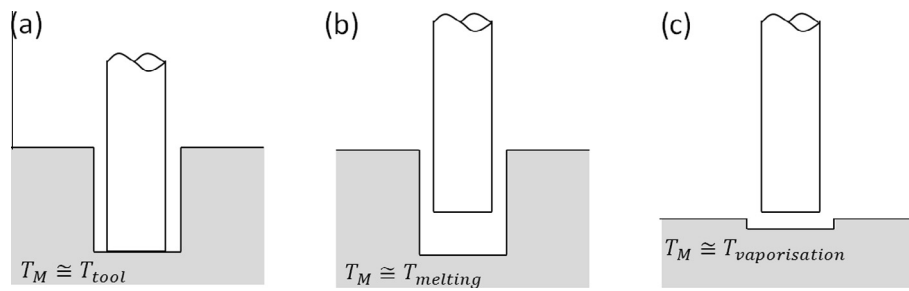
Schematic of three cases relevant to SACE machining: (a) For deep holes where tool–glass contact occurs frequently, the machining temperature is similar to that of the tool ($T_M = T_{\text{tool}}$), (b) When a machining gap is formed during drilling, the machining temperature is similar to the melting temperature of the electrolyte salt ($T_M = T_{\text{melting}}$), and (c) For shallow structures the machining temperature is similar to the electrolyte vaporisation temperature ($T_M = T_{\text{vaporisation}}$).
